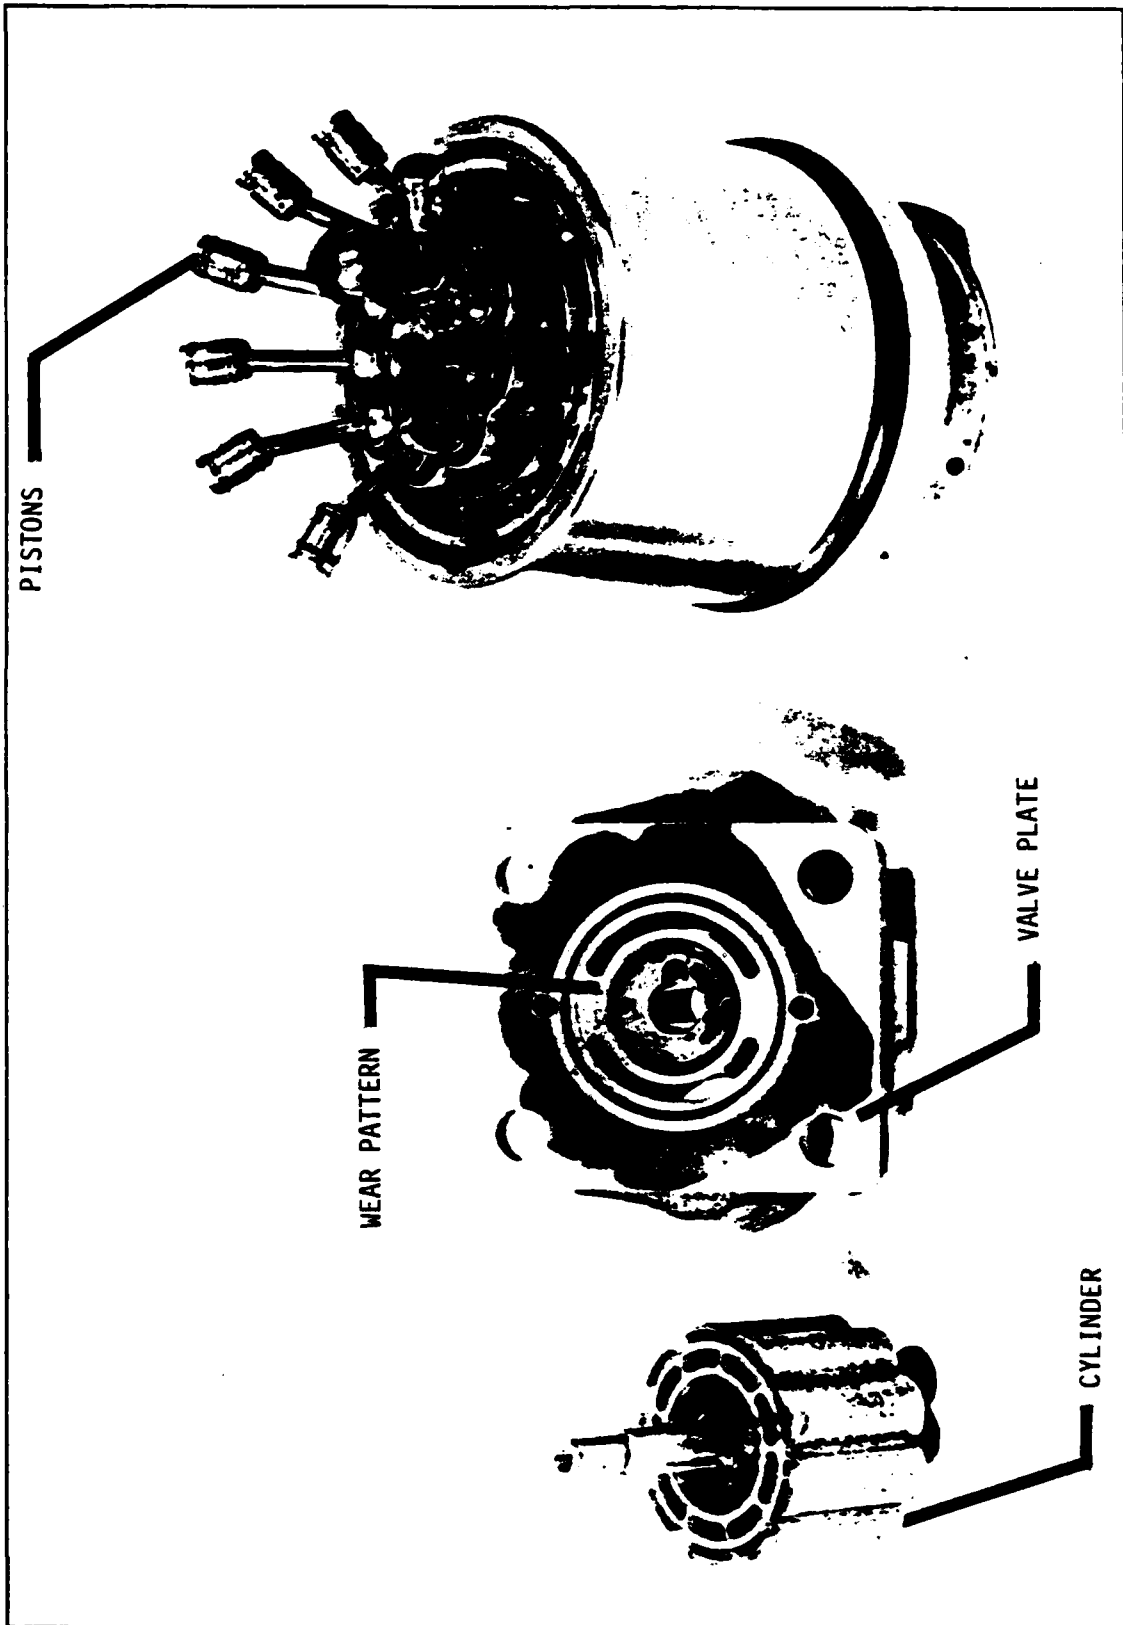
Cylinder, Valve Plate, and Piston Assembly
